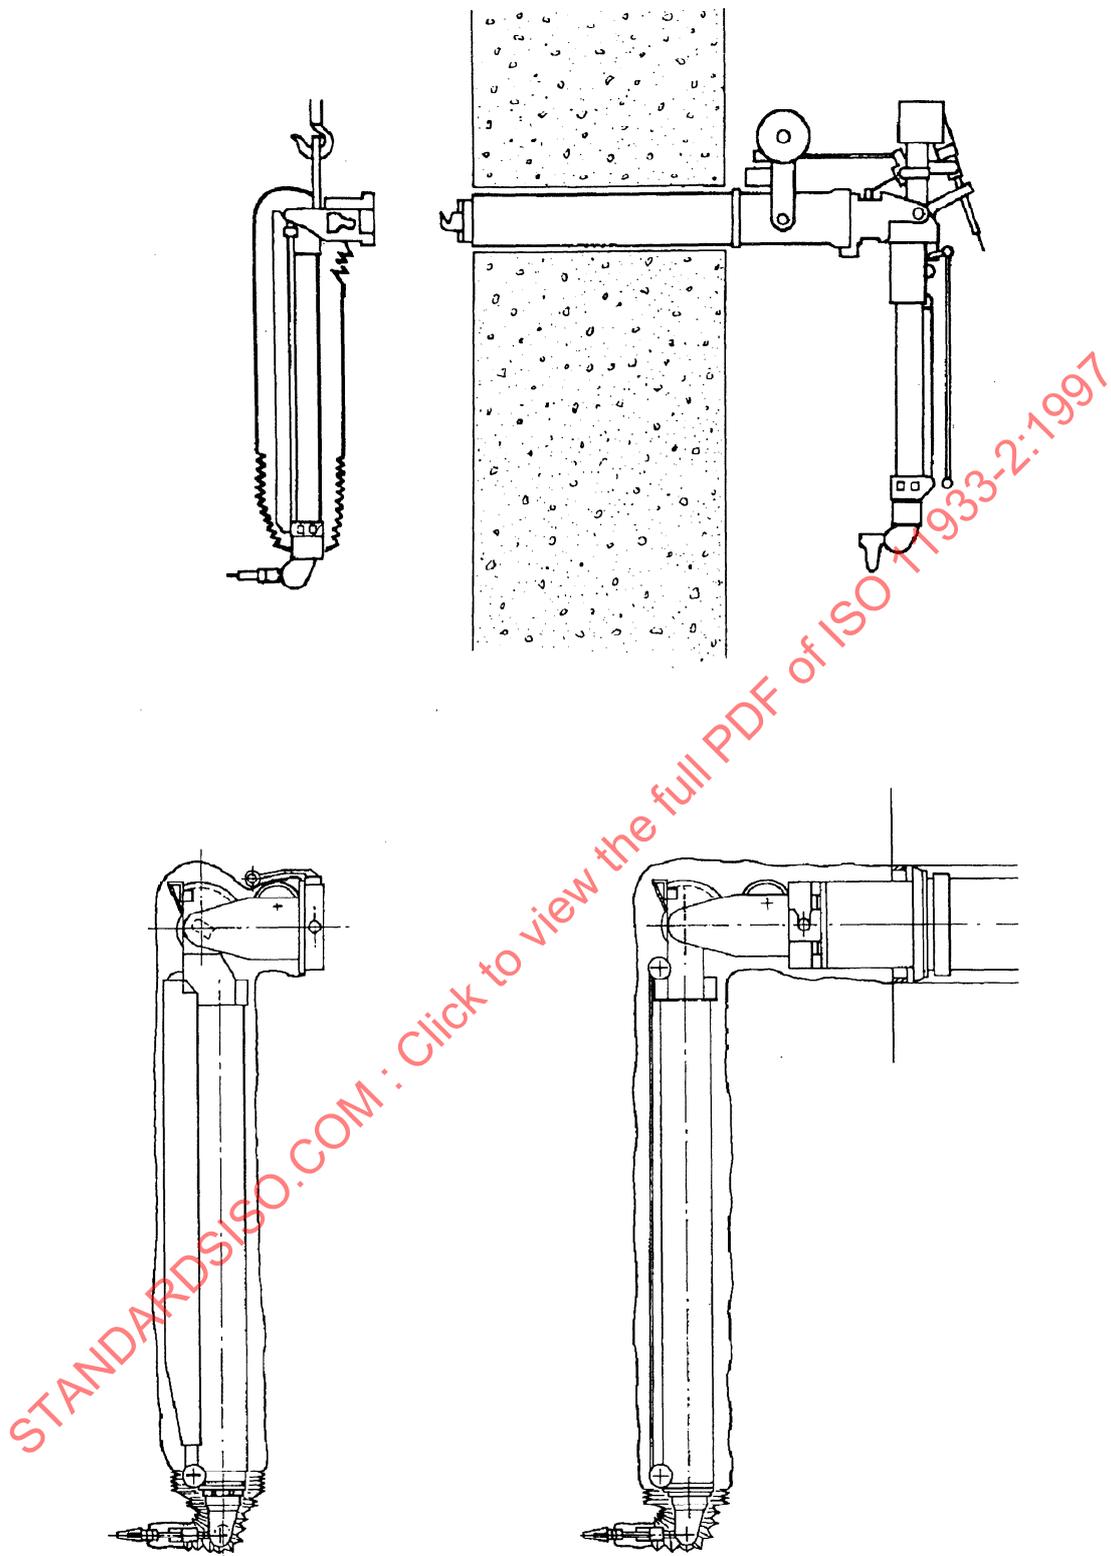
Gaiter fixed directly on a ring, which is situated behind the shoulder pivot of a removable slave arm
